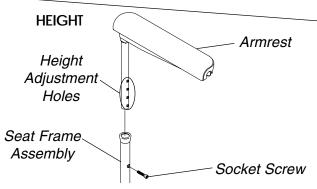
ADJUSTING CAPTAIN'S SEAT ARMRESTS
